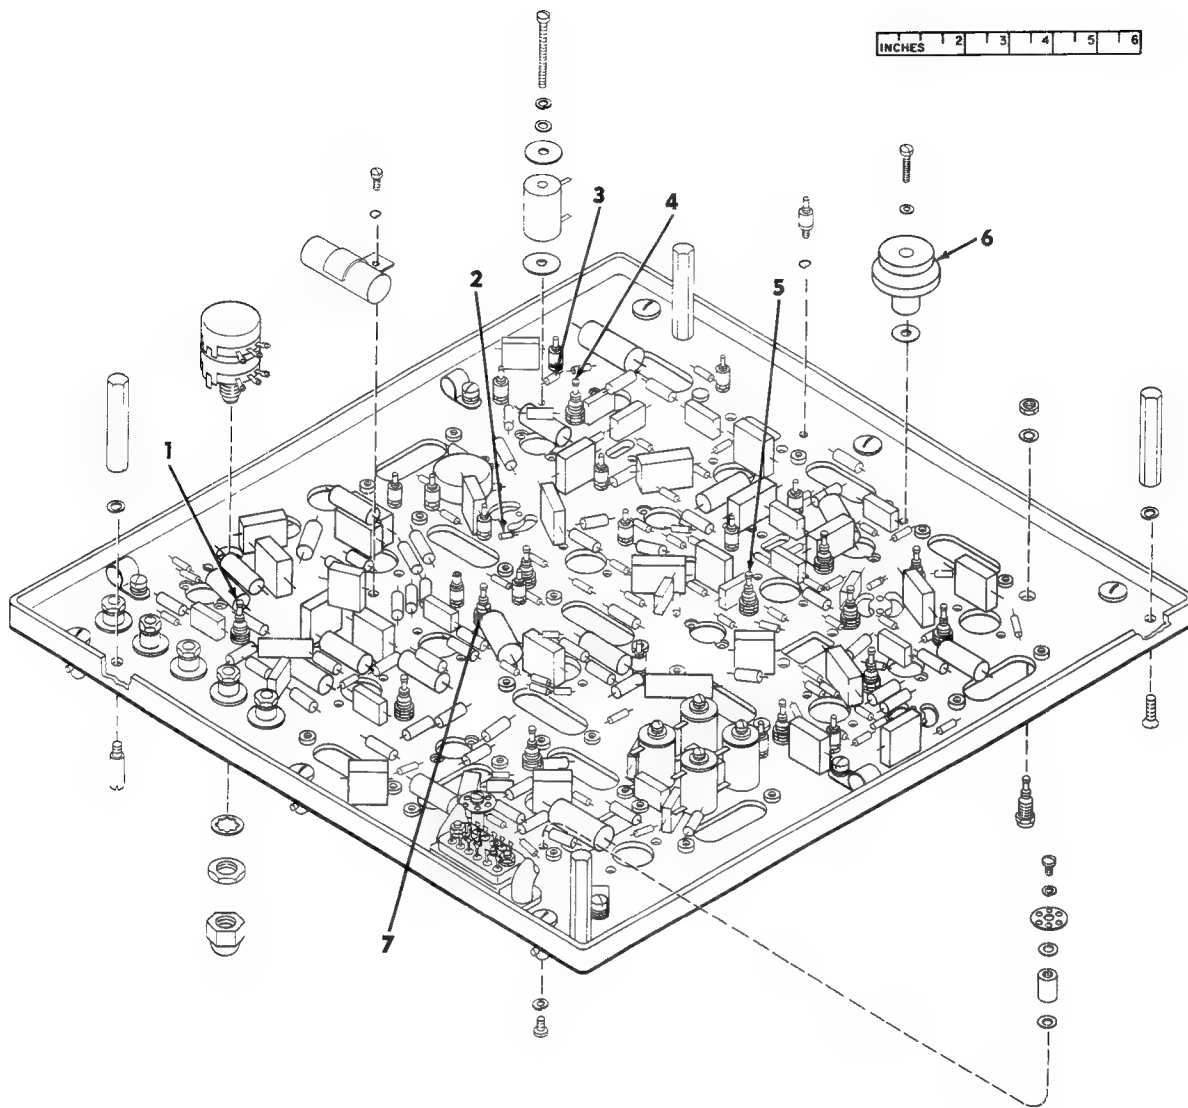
Coder, radar, guided missile (8159349)—partial exploded view
